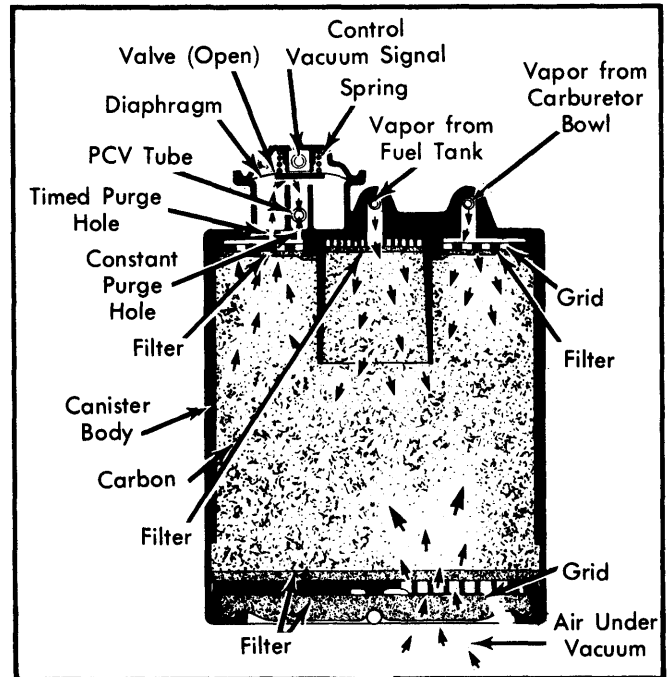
Cutaway View of Carbon Canister with Purge Valve
